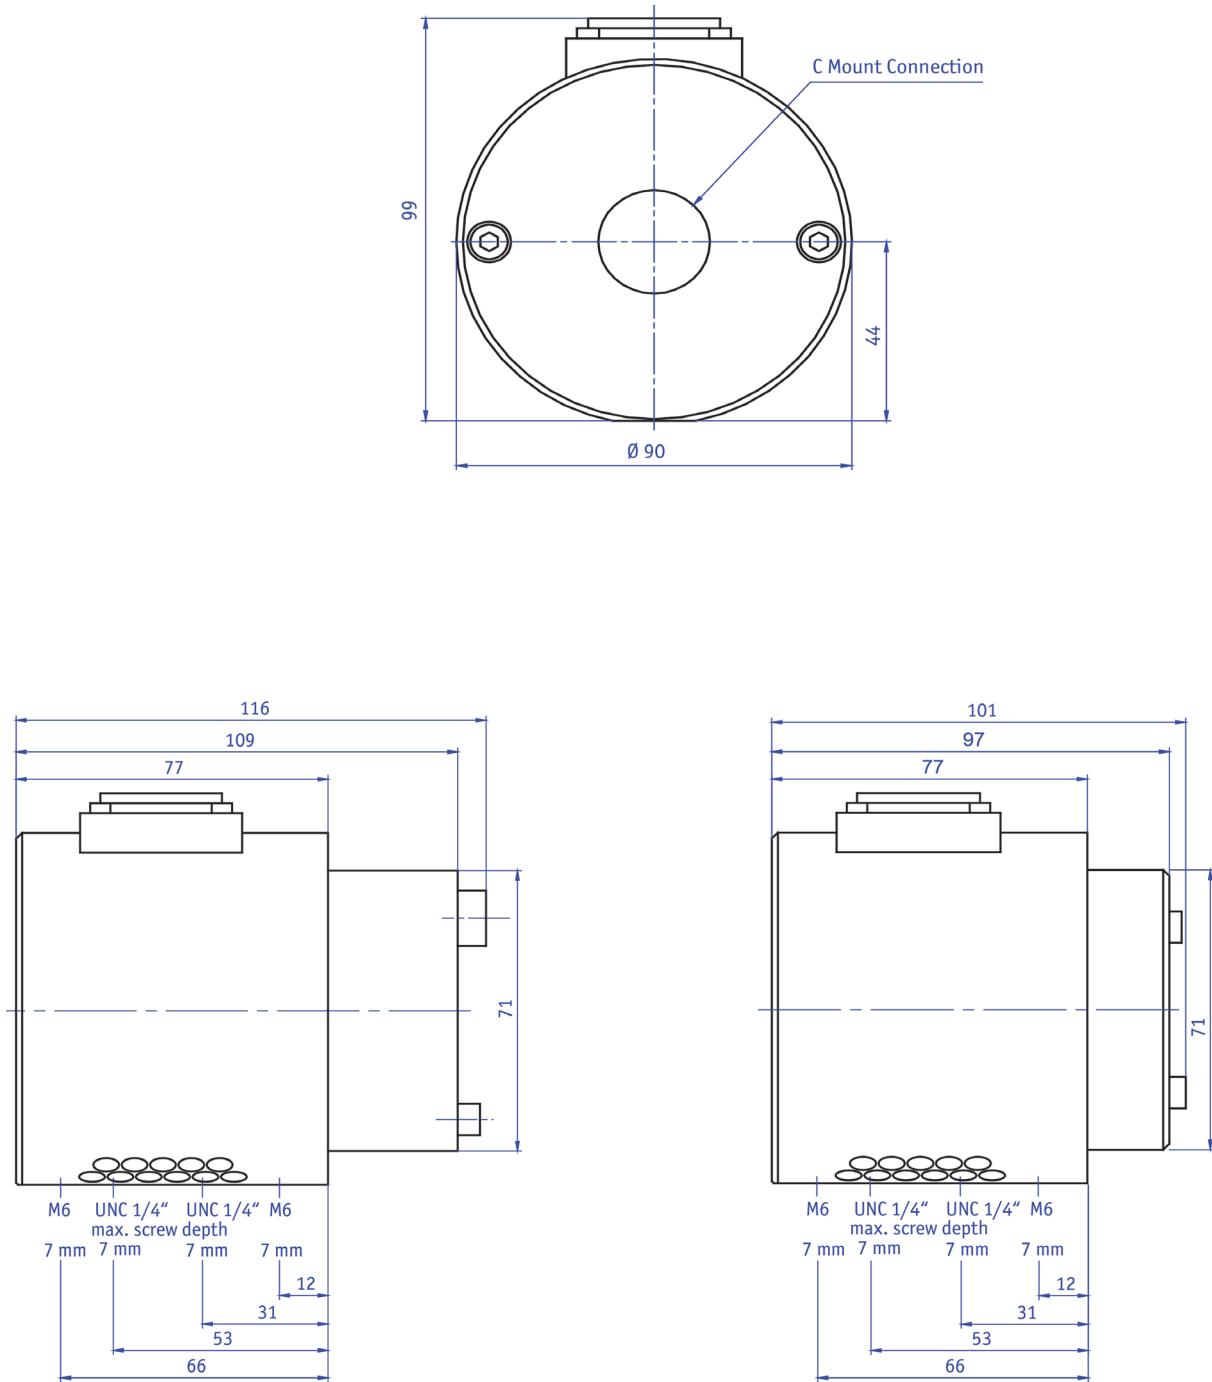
Camera dimensions: Goldeye P-008 SWIR Cool
